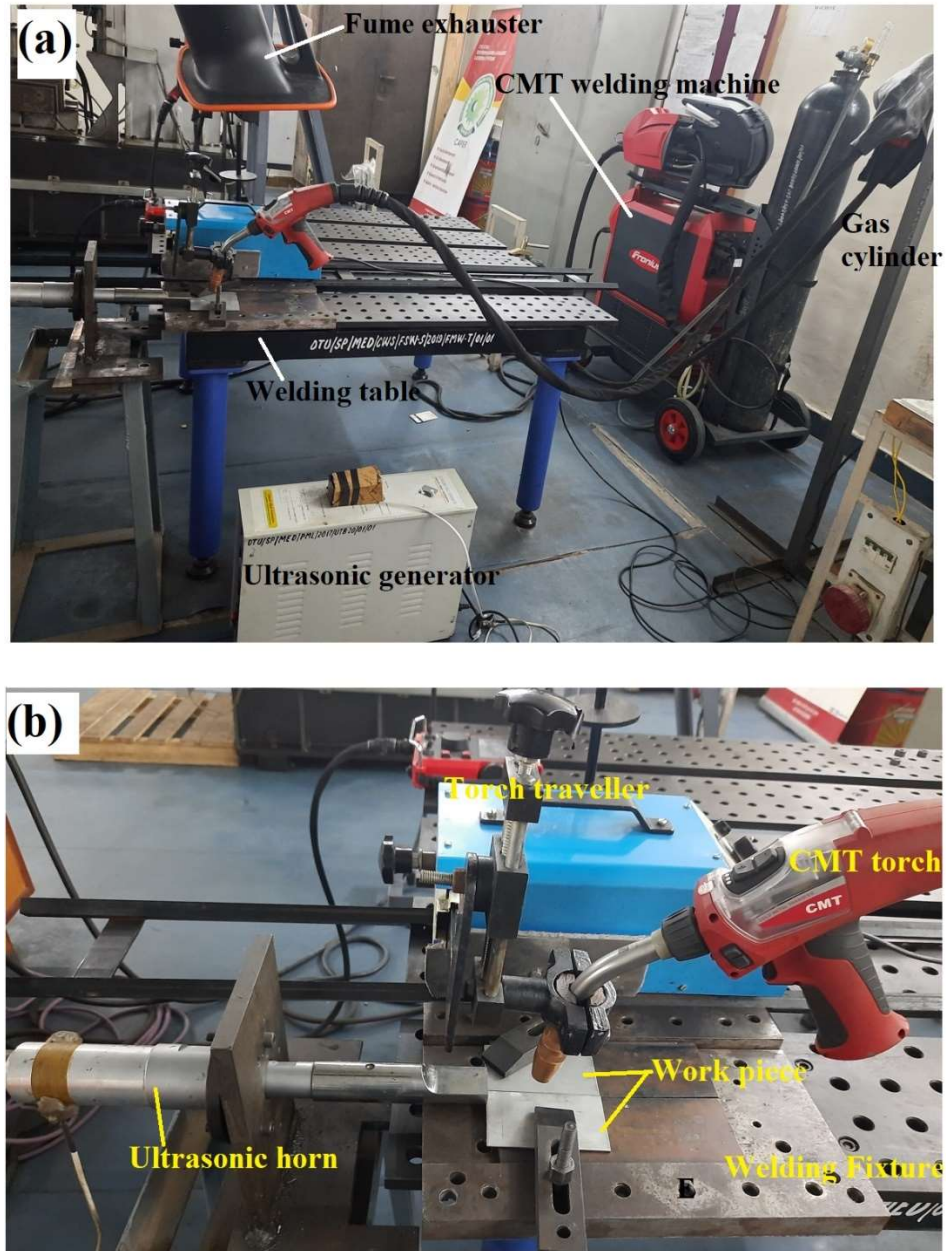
(a) Ultrasonic assisted CMT welding experimental setup (b) Enlarged view
